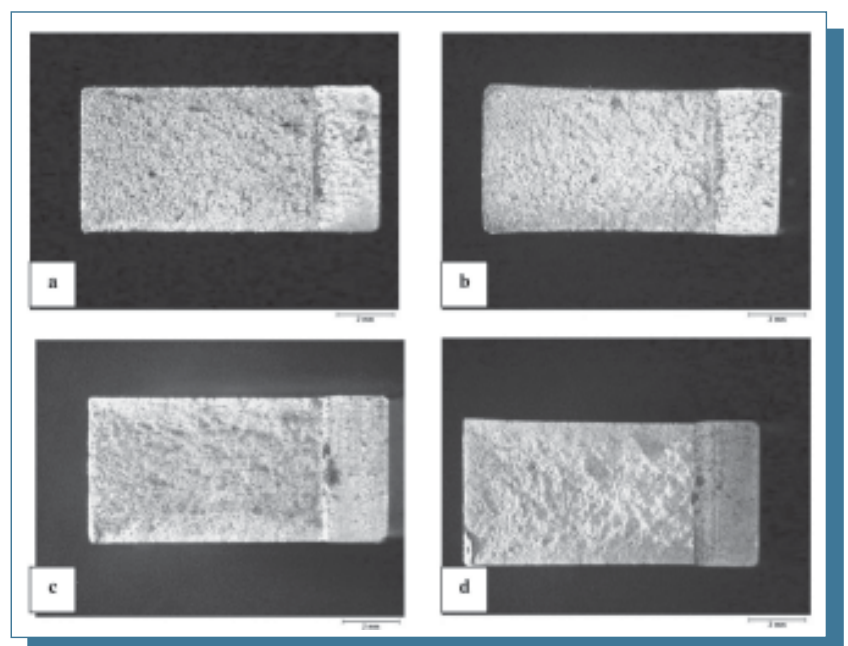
Fracture surfaces at low magnification of Charpy impact specimens: base (a) and FSW (b) W6A20A composite; base (c) and FSW (d) W7A10A composite.
